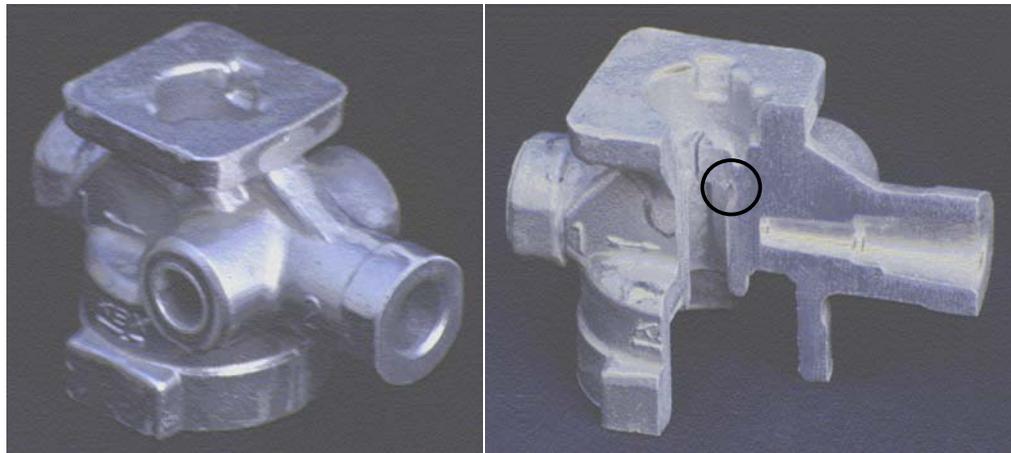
Test casting and its section showing shrinkage defect.
